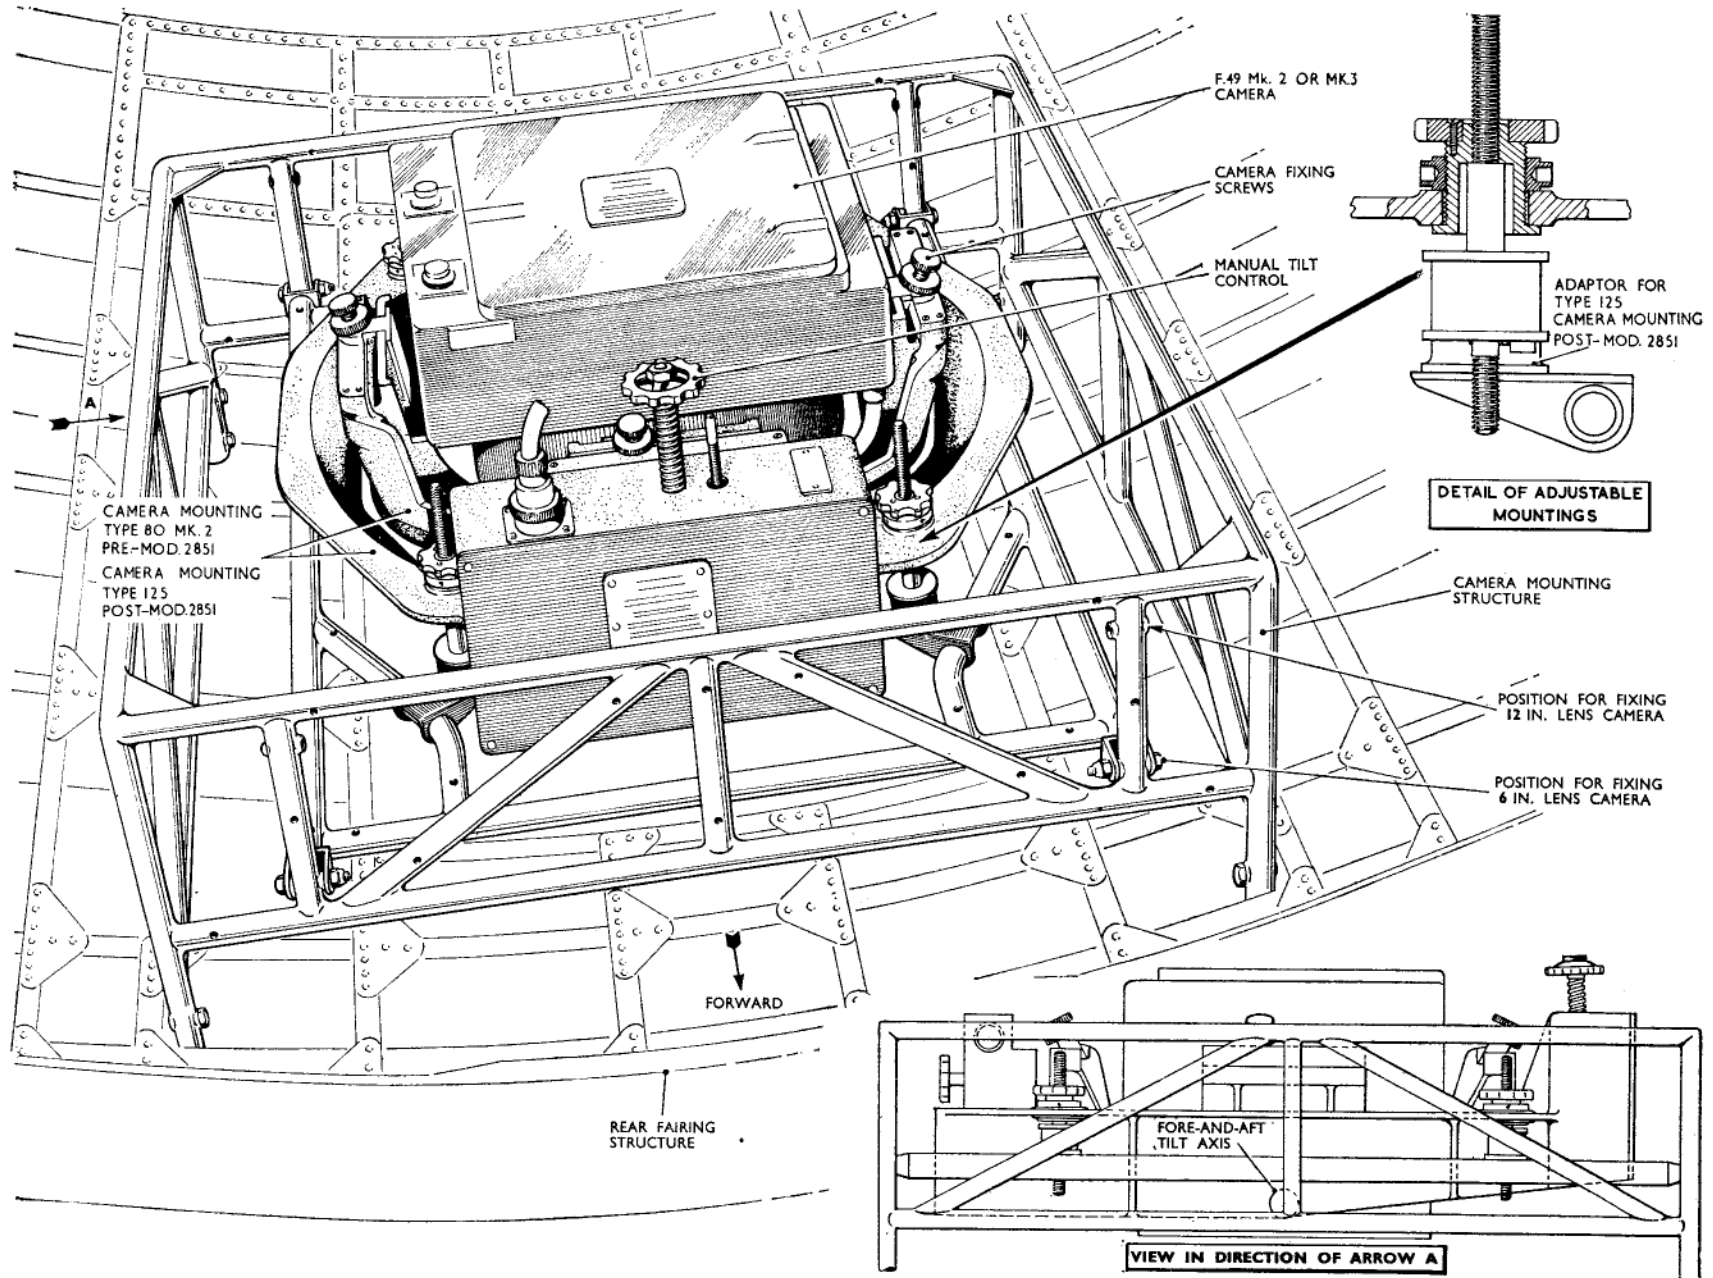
Rear fairing camera mounting ◀ Alternative camera mounting (post-Mod. 2851) ▶
